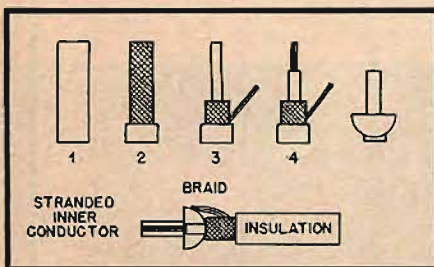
How pin plug terminals are soldered onto end of double conductor cable. Center wire passes into the shank of the pin plug and soldered; outer braided wire is soldered to rim of shell portion of the plug. (See also Figure 12.) To keep both hands free for soldering, you can "goose-neck" the solder from its carton.
